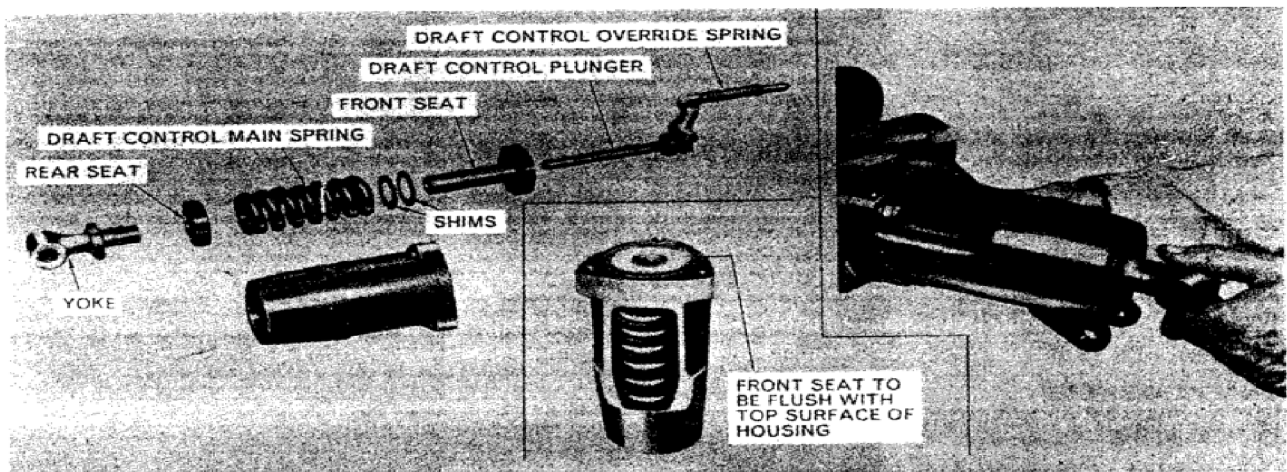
Exploded and assembled views of draft control main spring assembly. Shims are placed between main spring and front seat to bring front seat flush with housing (early units) as shown in center view. View at right shows turning yoke to adjust main spring.
